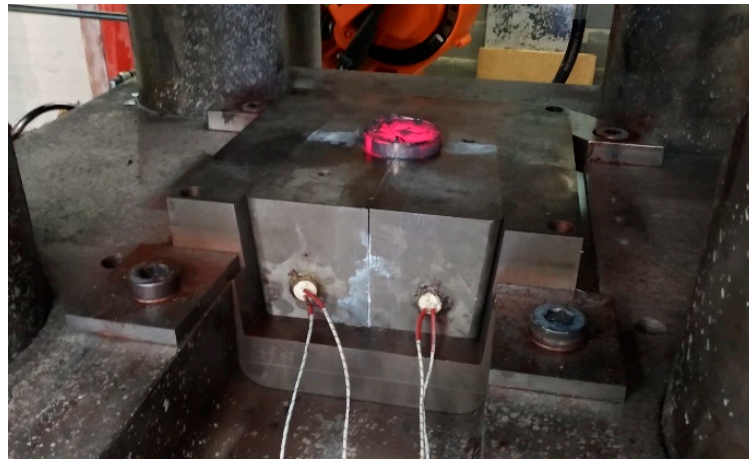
Bottom die holder with the two semi-moulds just after the NSF process. Note that the bottom die holders' dimension is 350 mm × 350 mm × 240 mm.
